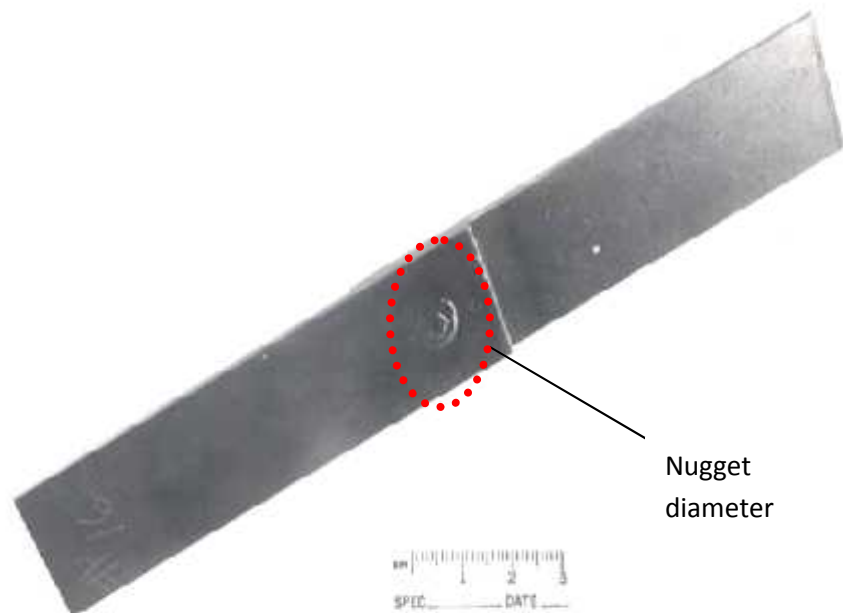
Specimens of Sheets Metal which is Joints Using the Resistance Spot Welding Machine
